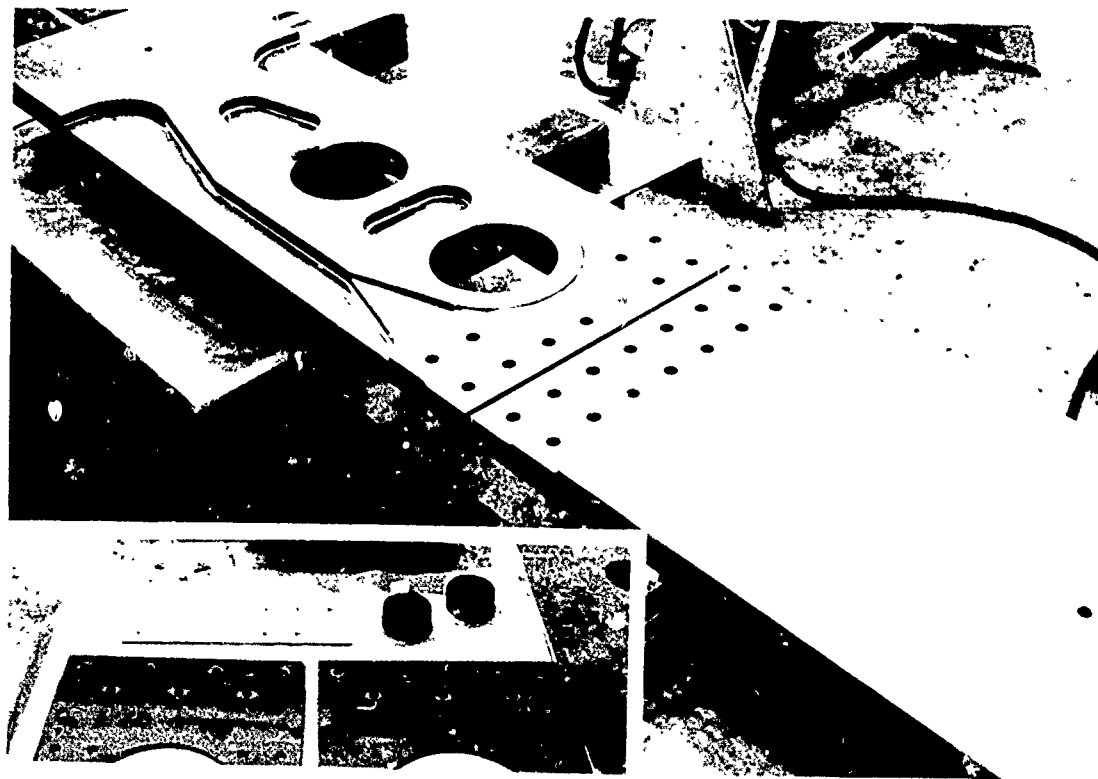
603FTB053 DETAIL PARTS READY FOR SEALING APPLICATION AND ASSEMBLY
